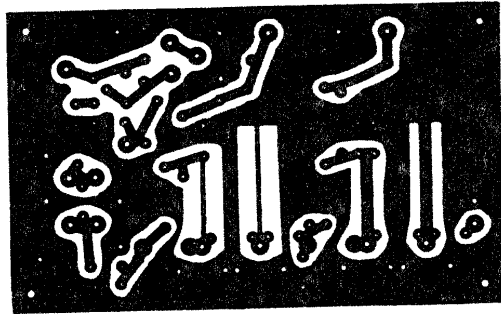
PCB of the LO module for 32(45)MHz crystals
